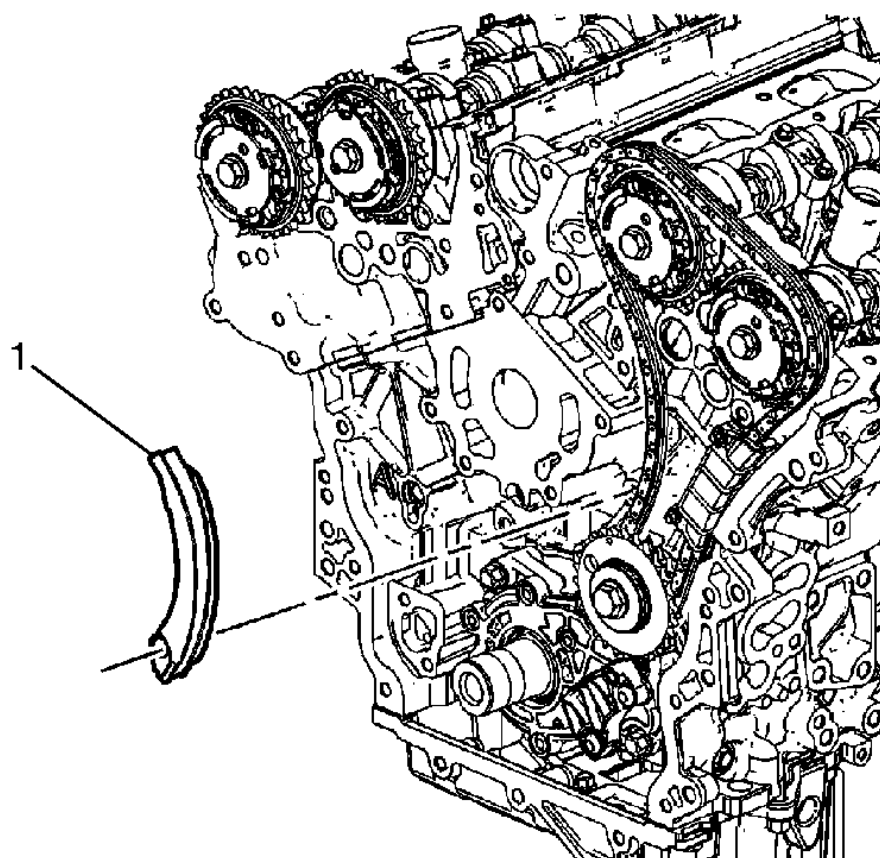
View Of Secondary Camshaft Drive Chain Guide Bolts
